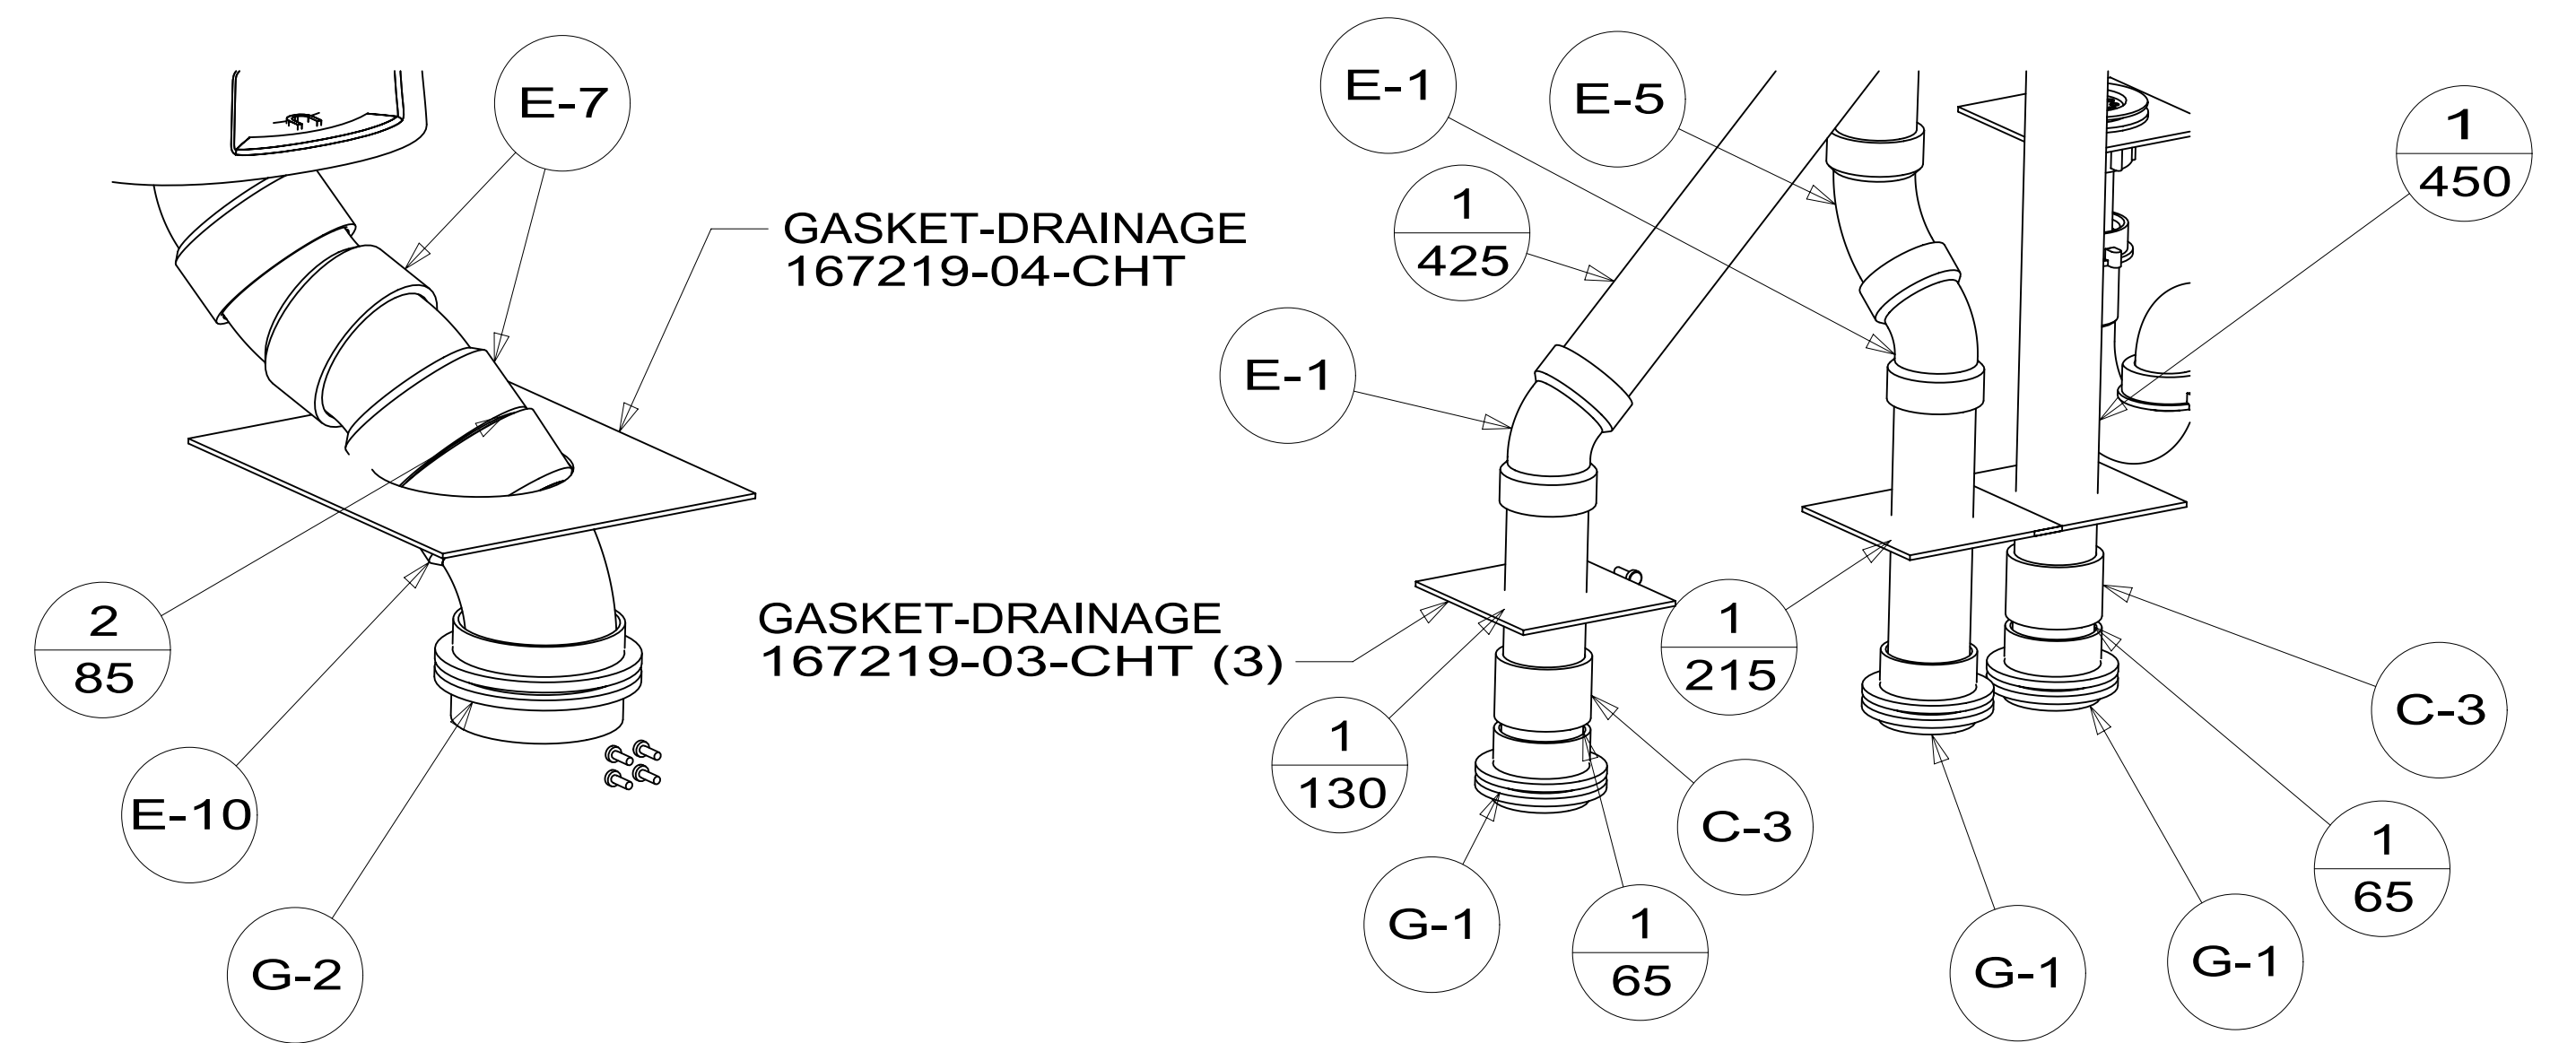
DETAIL BC (SHOWN W/OUT SHOWER & FLOOR)
